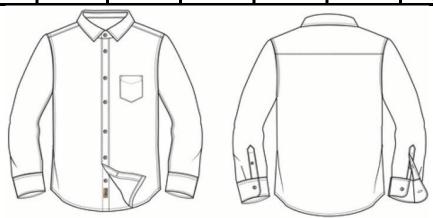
Technical drawing of the selected model (men's long sleeve shirt)
